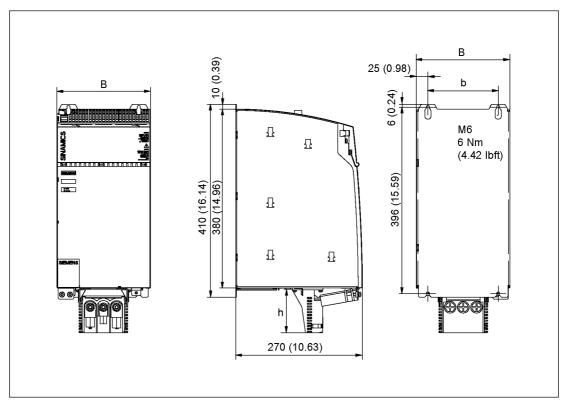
Dimension drawing of motor module with internal air cooling (45 A to 85 A)
